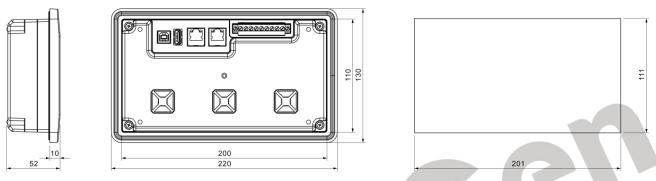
HPM6D Display Module Installation Dimensions (Unit: mm)
